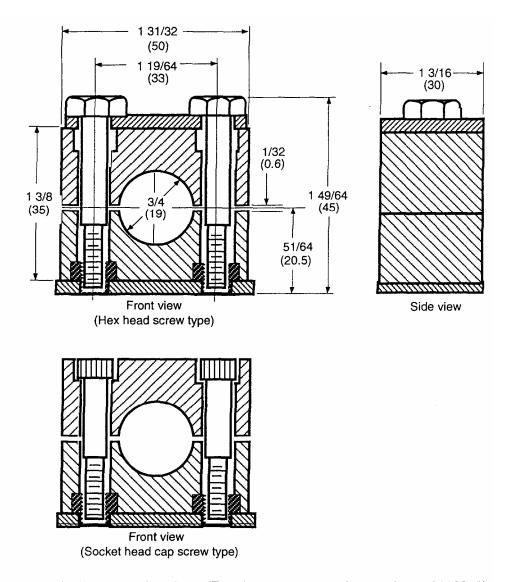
Double bolt mounting clamp (Top- Item # 2213902, Bottom- Item #2213903)
